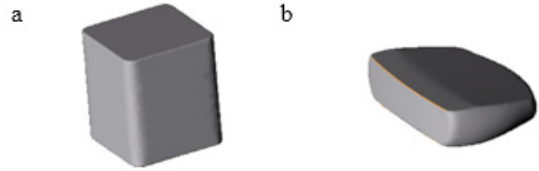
The upsetting simulation results: the initial billet (a) and the billet shape after upsetting by the dies with inclined surfaces (b).
